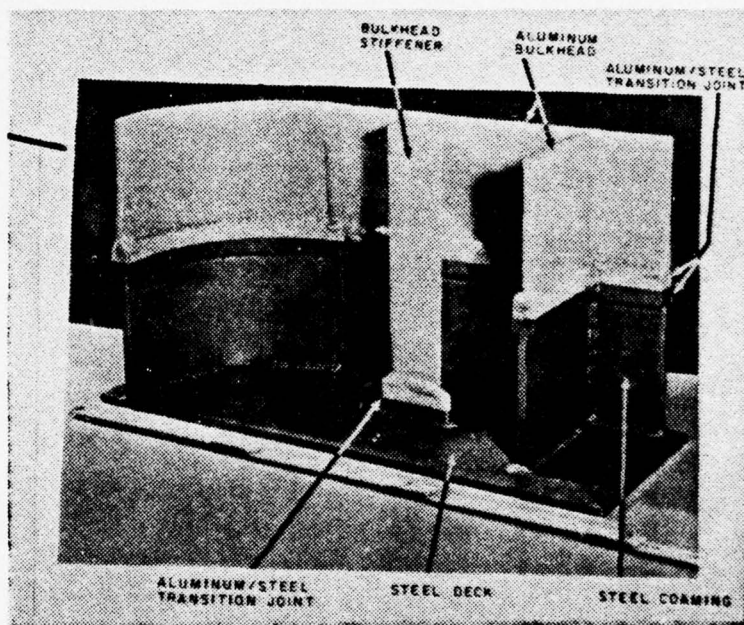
Typical aluminum superstructure and steel deck connection demonstrating the use of welding transition joints.
